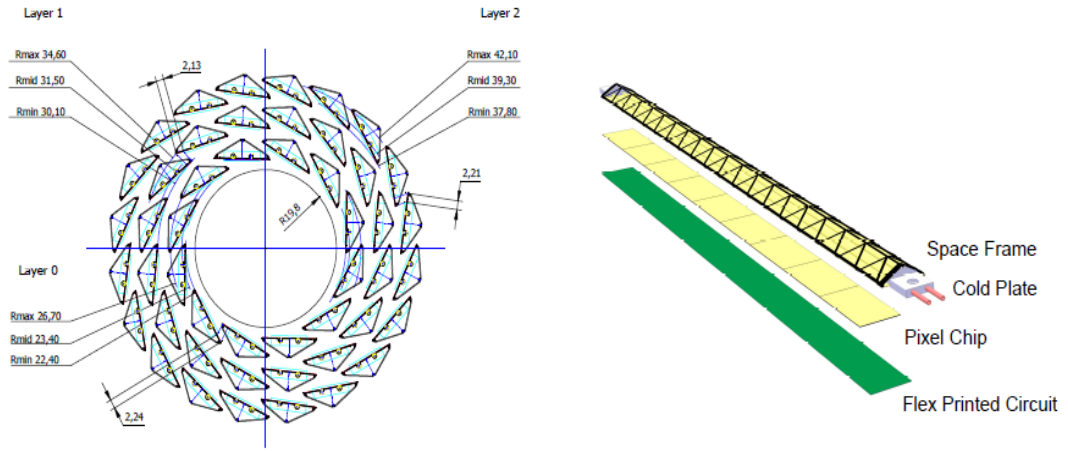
Cross section and Stave layout for the Inner Barrel Modules.
